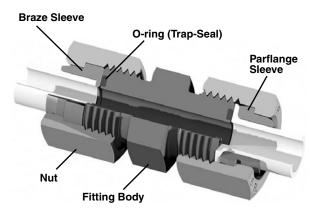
Seal-Lok Union cutaway with flanged and brazed assemblies
